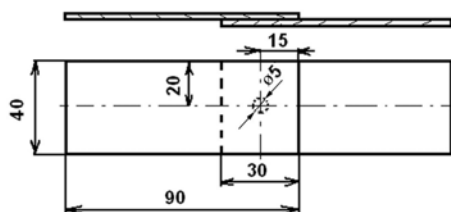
Dimensions of samples for the tensile test and principle of clinching
